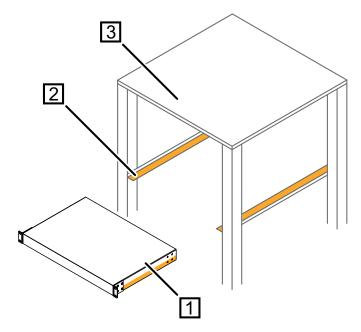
Assembly in a switch cabinet with sliding/mounting rails
